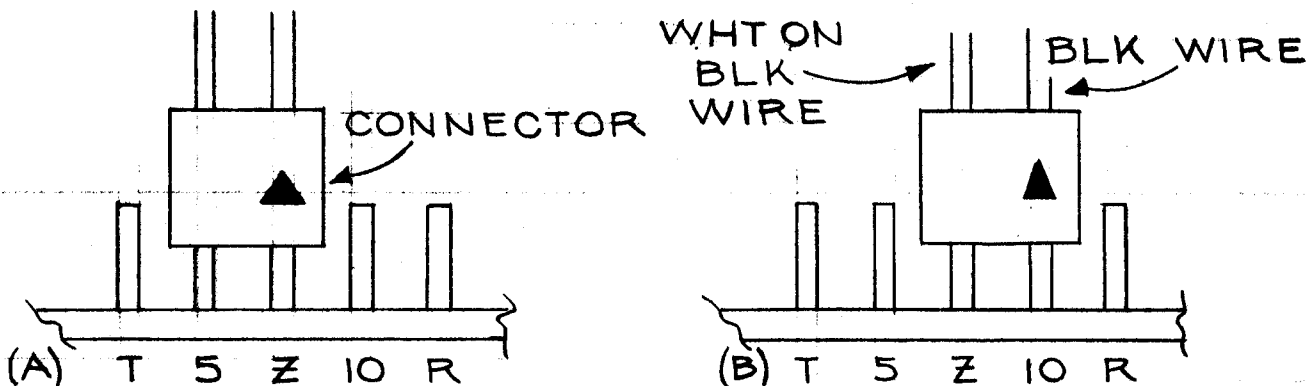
Partial view of Staircase board (670-1347-00) showing (A) 5 step connection and (B) 10 step connection.
